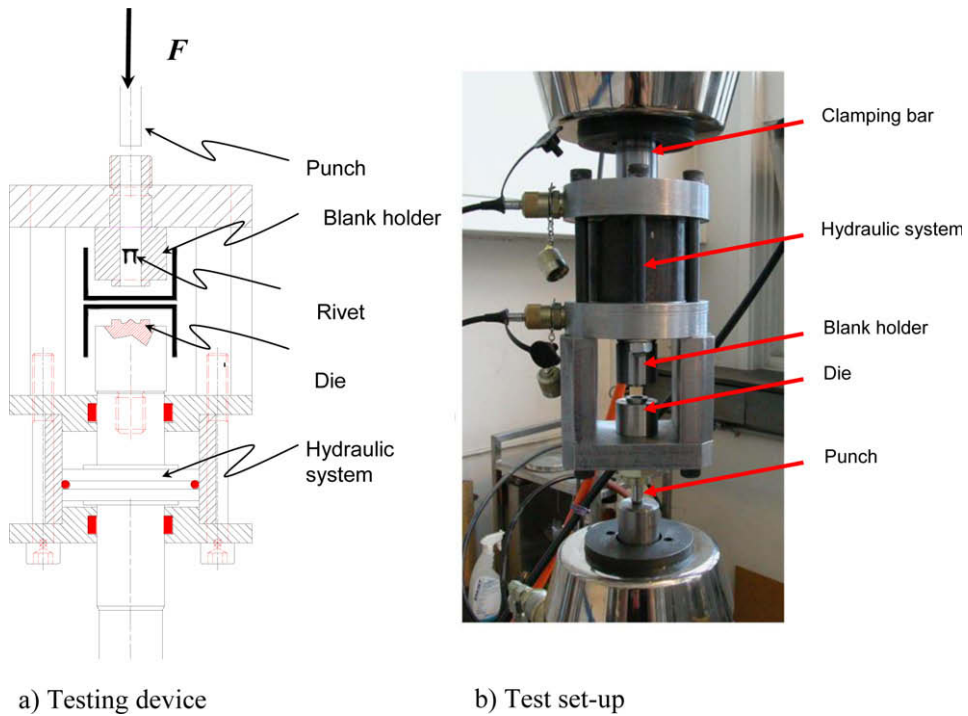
Testing device for riveting process (Porcaro et al., 2006a).
